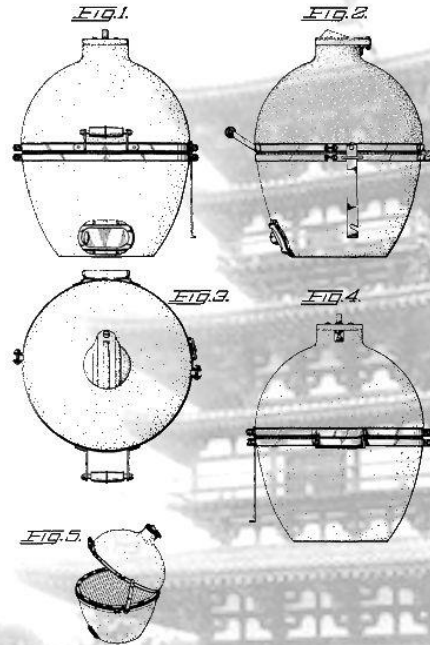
is a front elevational view of a combined barbecue grill and smoker, showing my new design;
